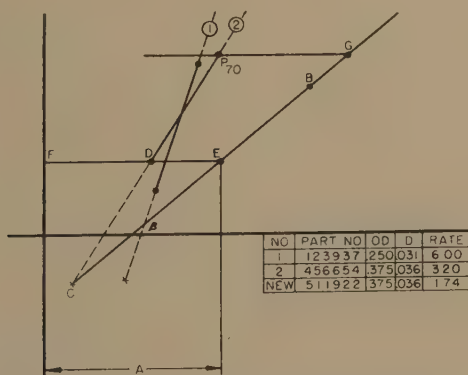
SPRING DESIGN, GRAPHICAL METHOD
